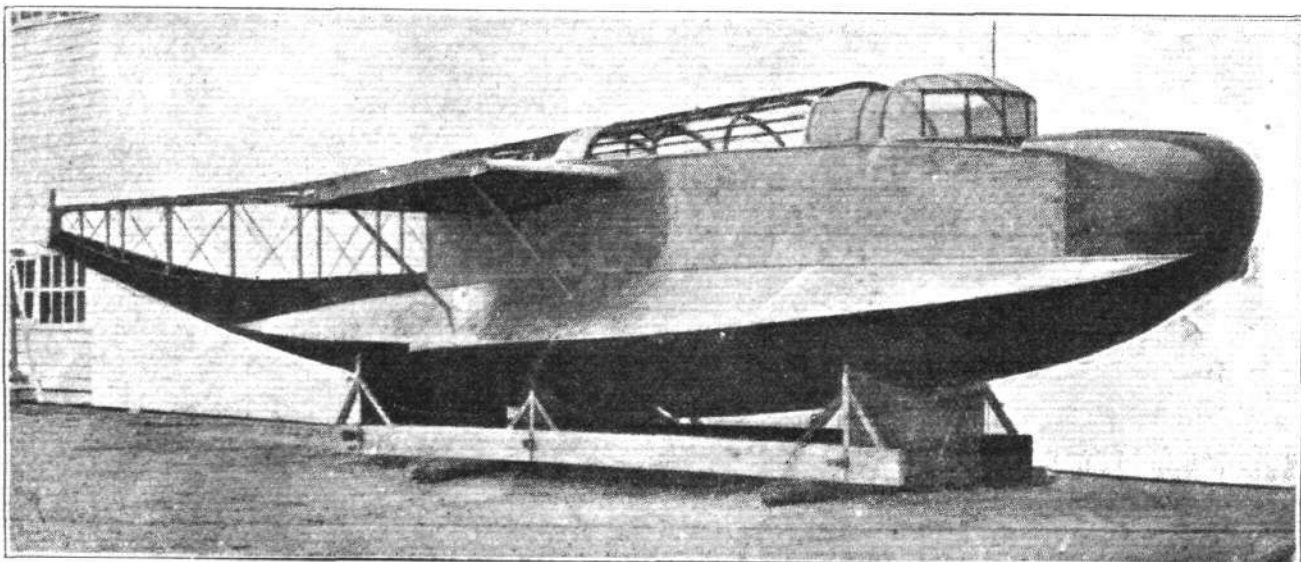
Type F. Hull ready for mounting wings and engines.
